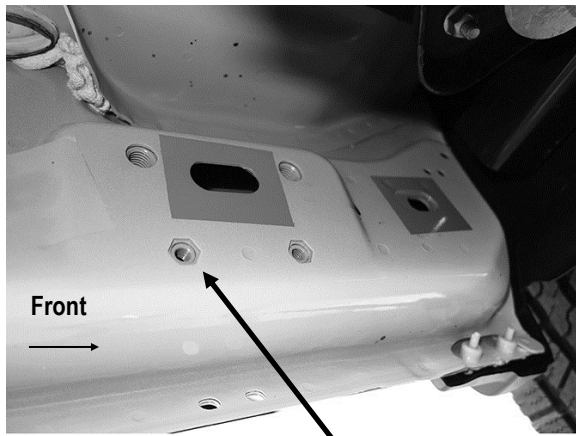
Attach Bracket To M8 Nut/Bolt Plate
